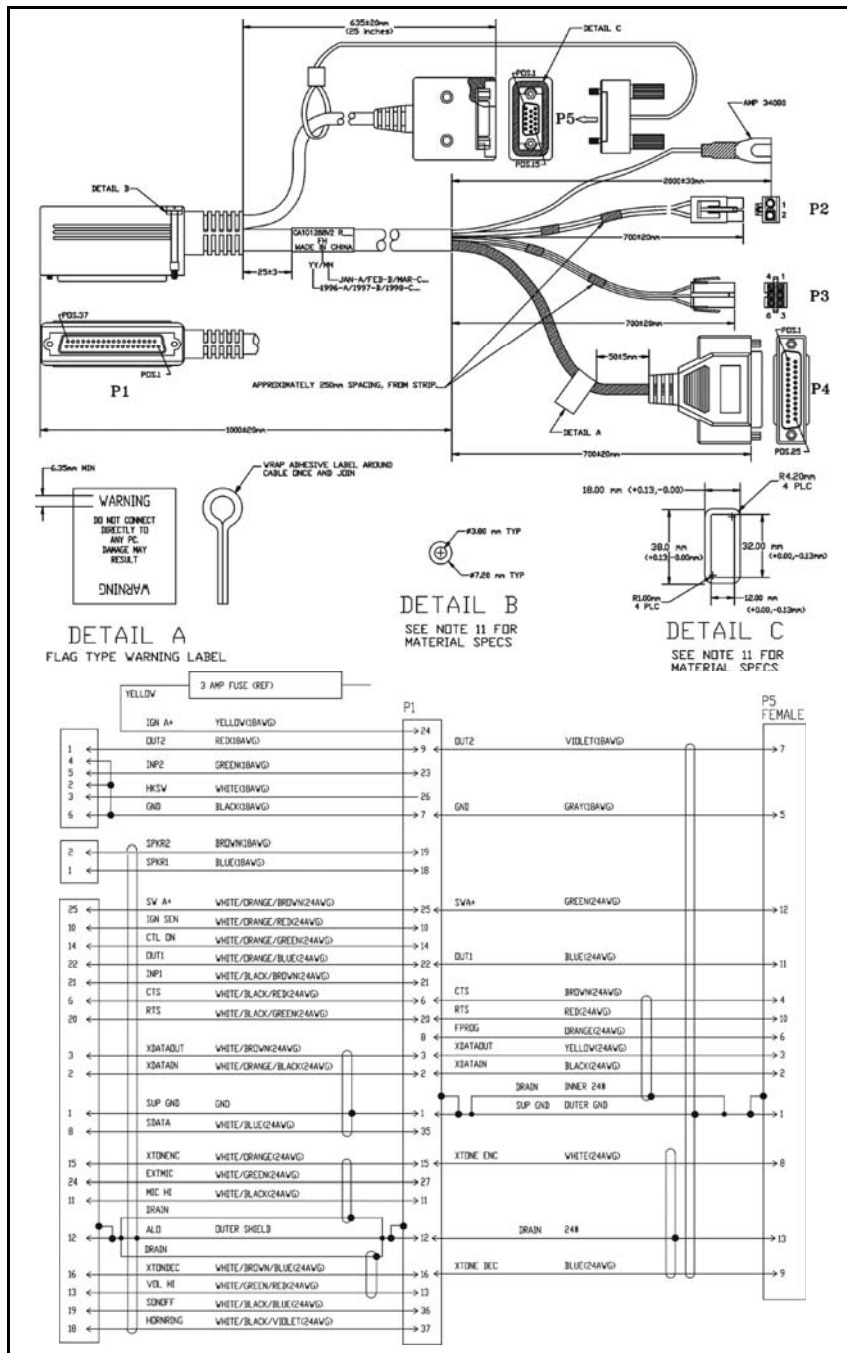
Front Mount Extended Option Accessory Cable CA101288V2
